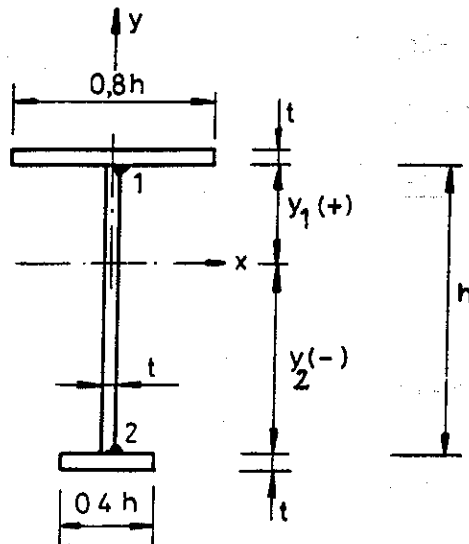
Welding sequence for an asymmetric I-beam
